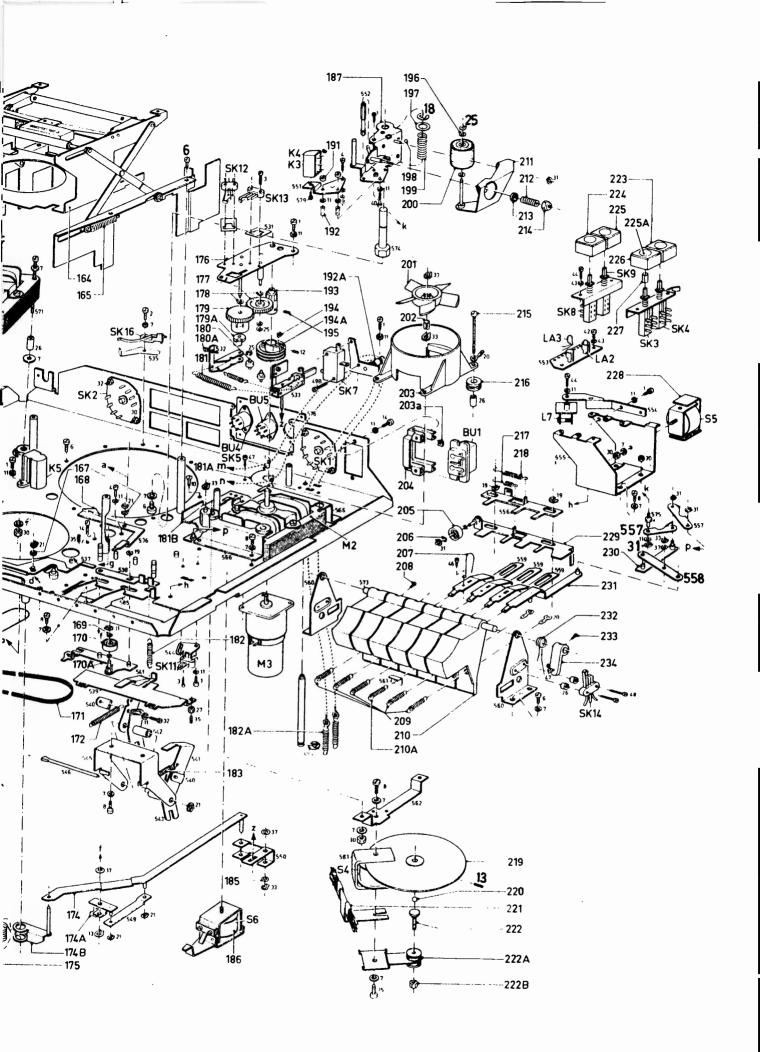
Exploded view of the Ph TELEVISION JULY 1980
